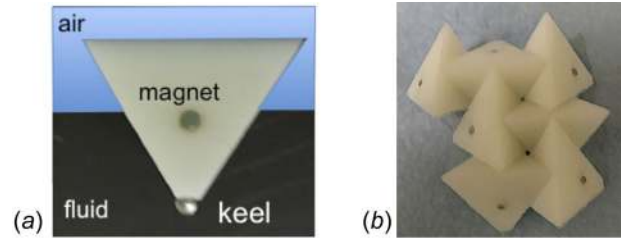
(a) Unit element with features for directional self-assembly at the air–fluid interface. Unit element manufactured by polyjet 3D printing. (b) Self-assembled TIM based on unit elements shown.
